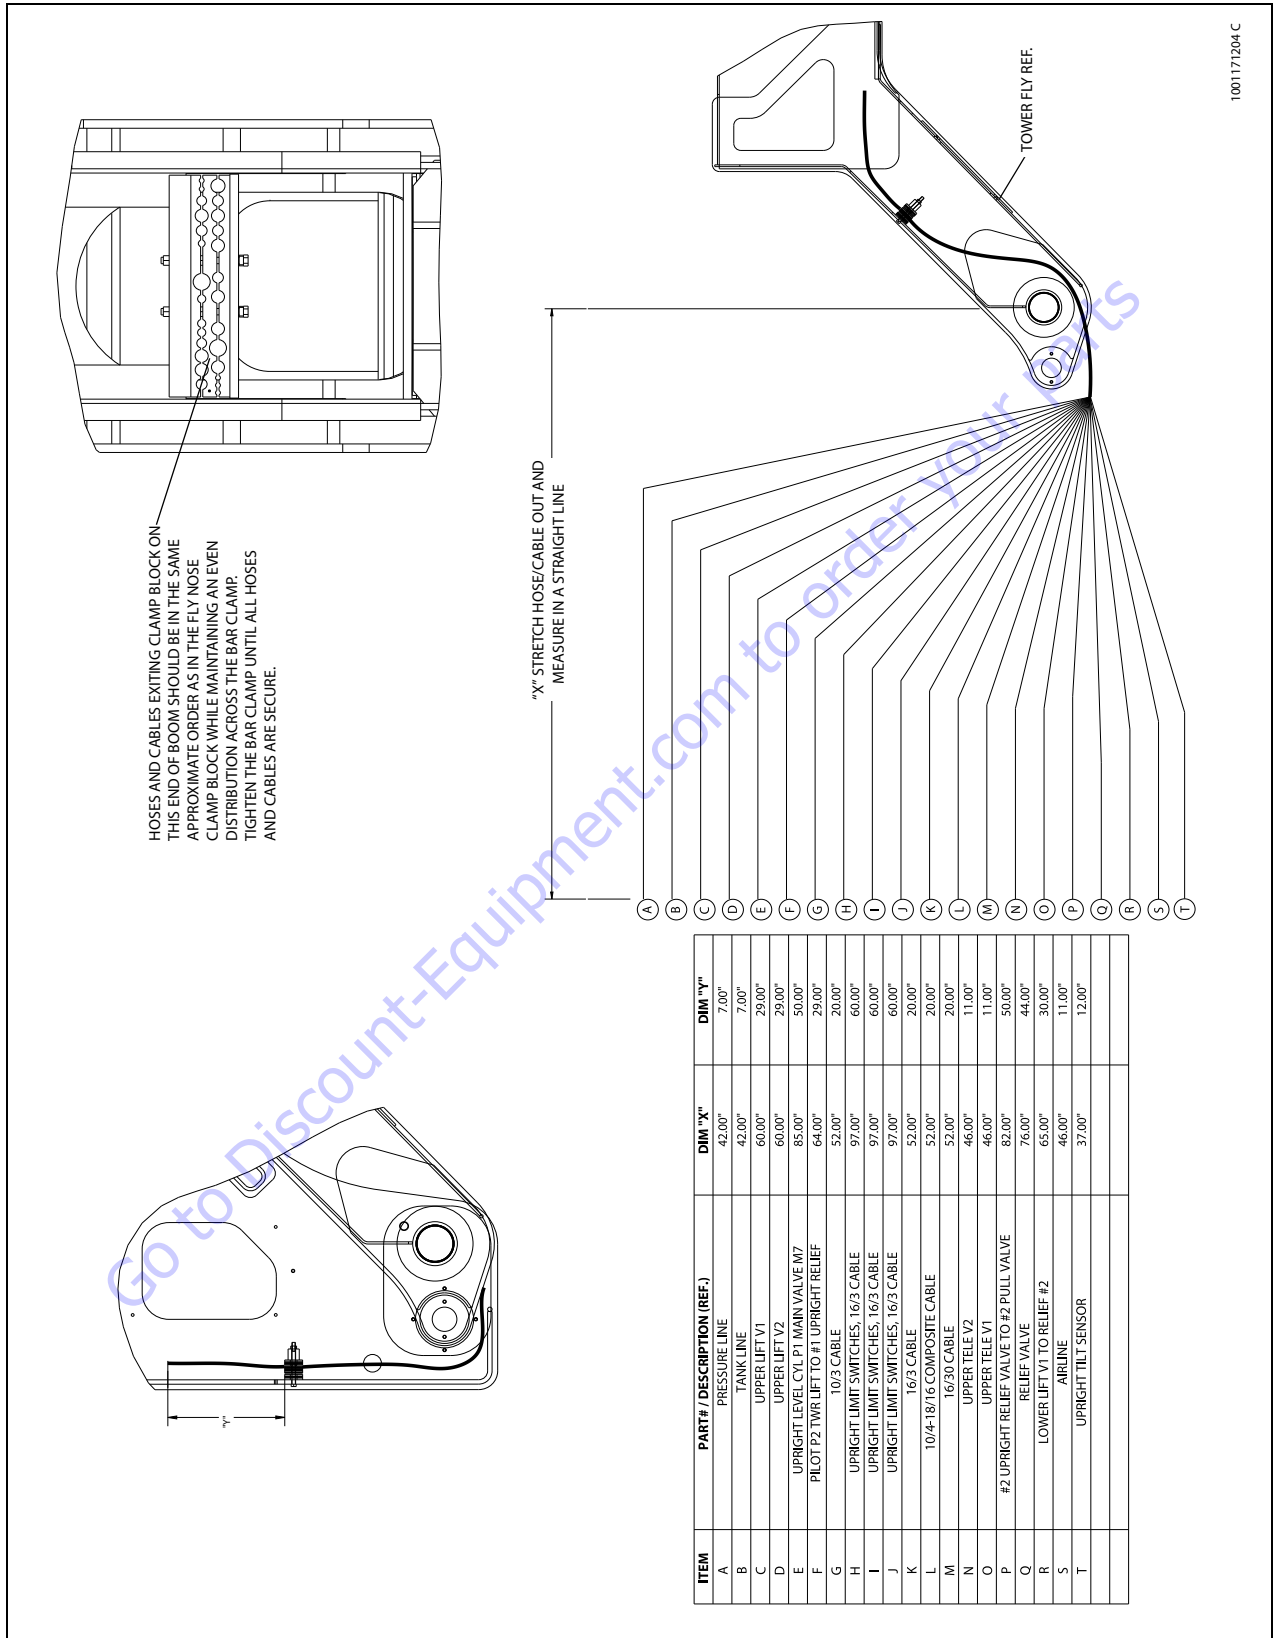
Hose and Cables Installation Tower Boom (Sheet 1 of 2)
